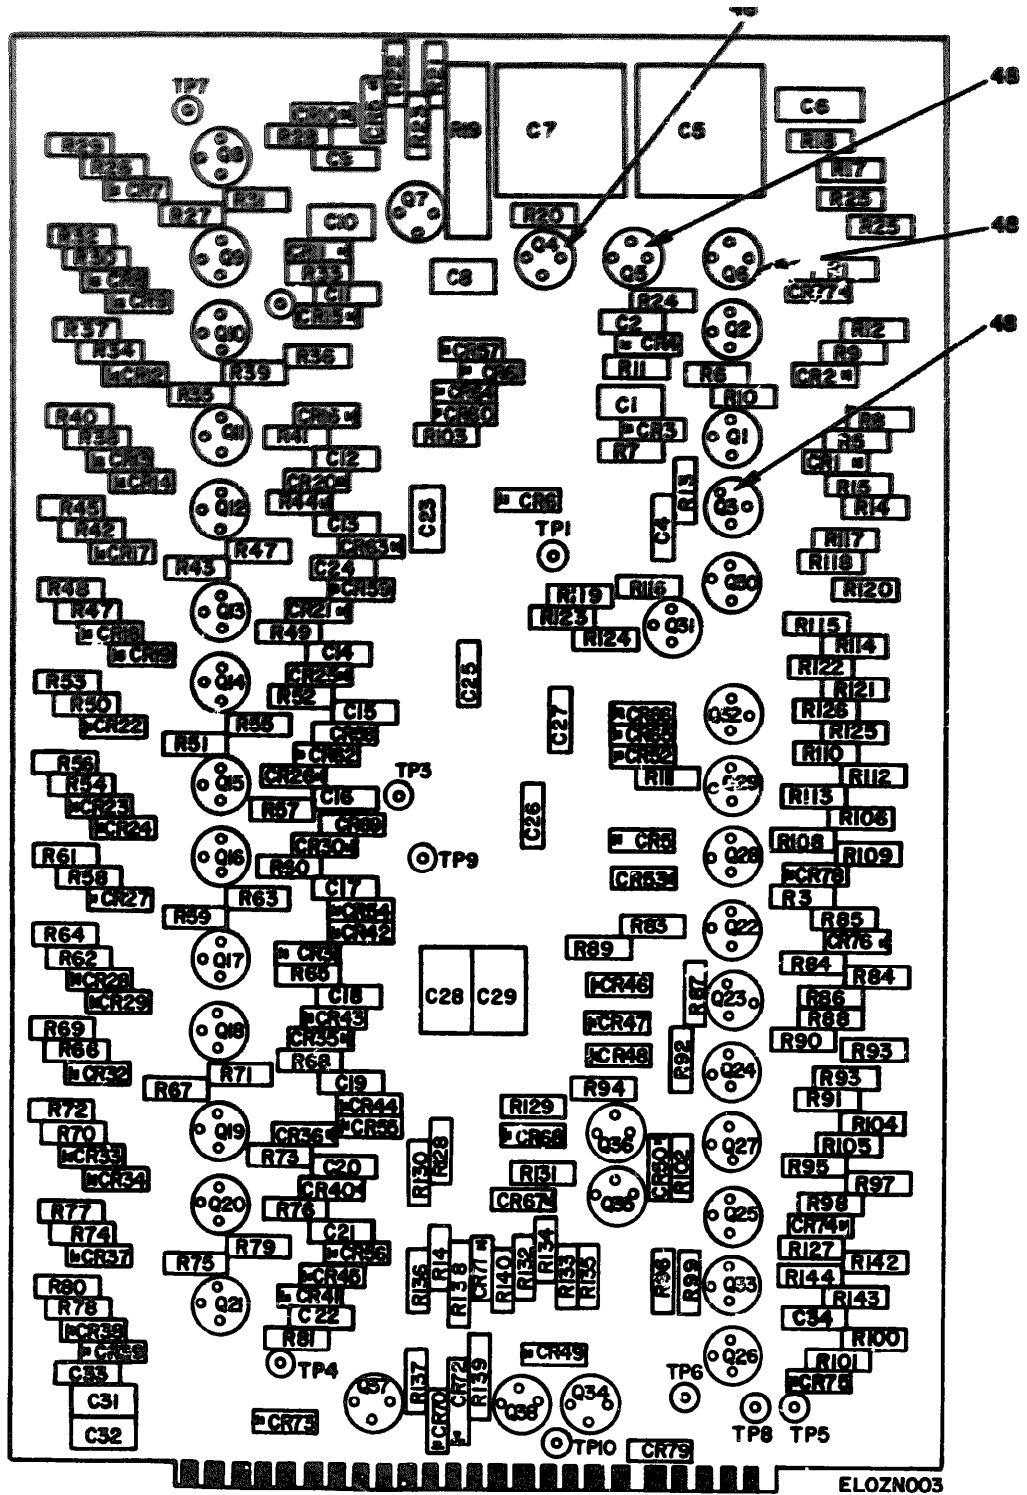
Alarm-Monitor Subassembly Timing Module (1A1) (Sheet 1 of 3).
